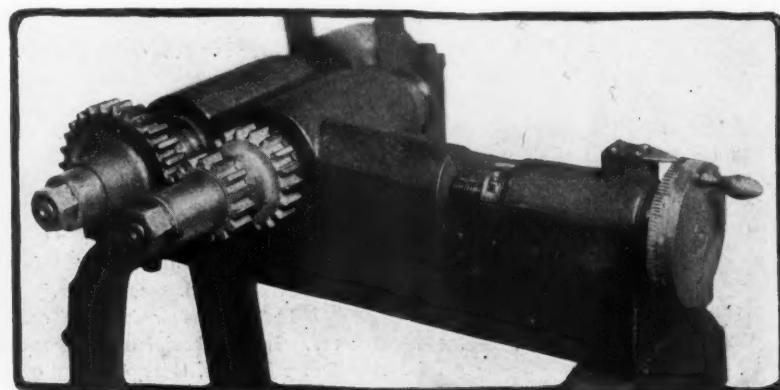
Special gear-test machine in which transmission gears are tried out in pairs to be certain of proper meshing; the center distances on this machine are the same as those between the shafts of the gearset when the gears are in use
